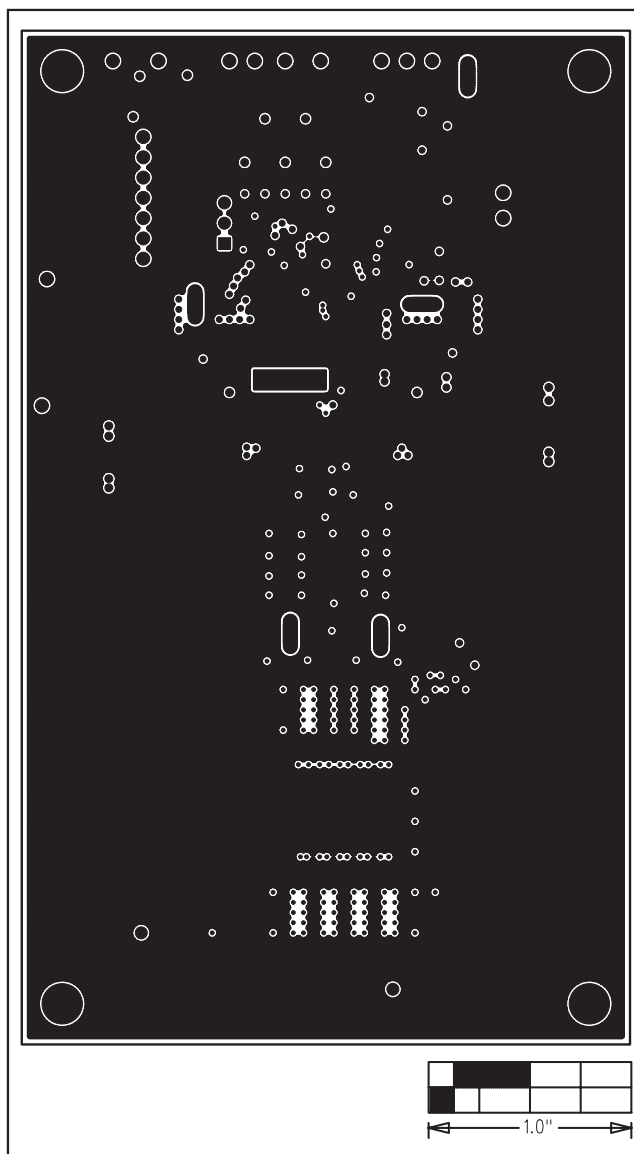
MAX17021 EV Kit PCB Layout—Internal Layer 7 (PGND Layer)
